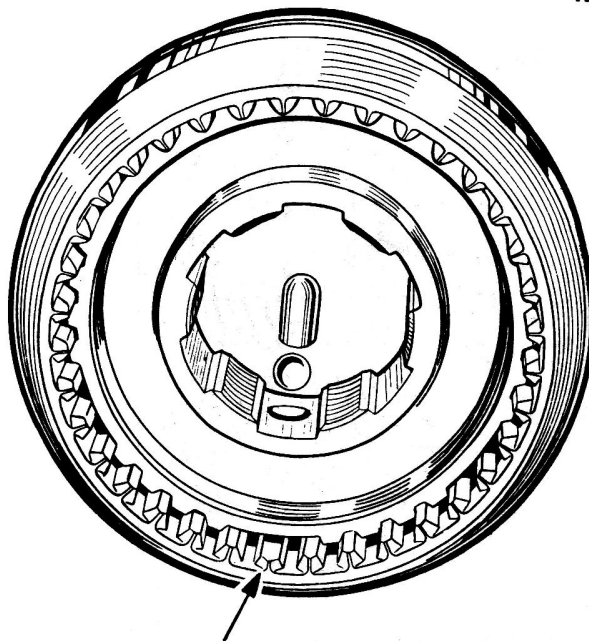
The relieved tooth must be in line with the ball and plunger holes
